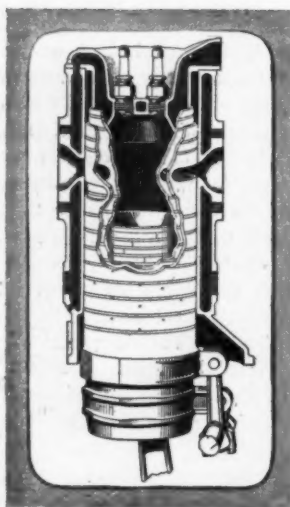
Section through a cylinder of the Stoddard-Dayton Knight motor
